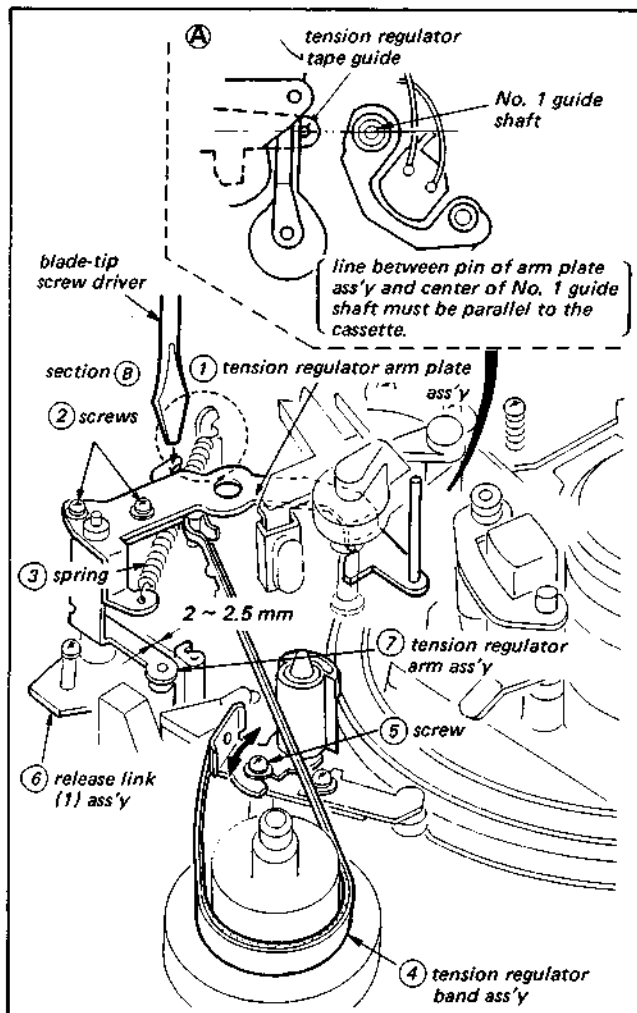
Replacement and adjustment (1) of tension regulator arm plate assembly
